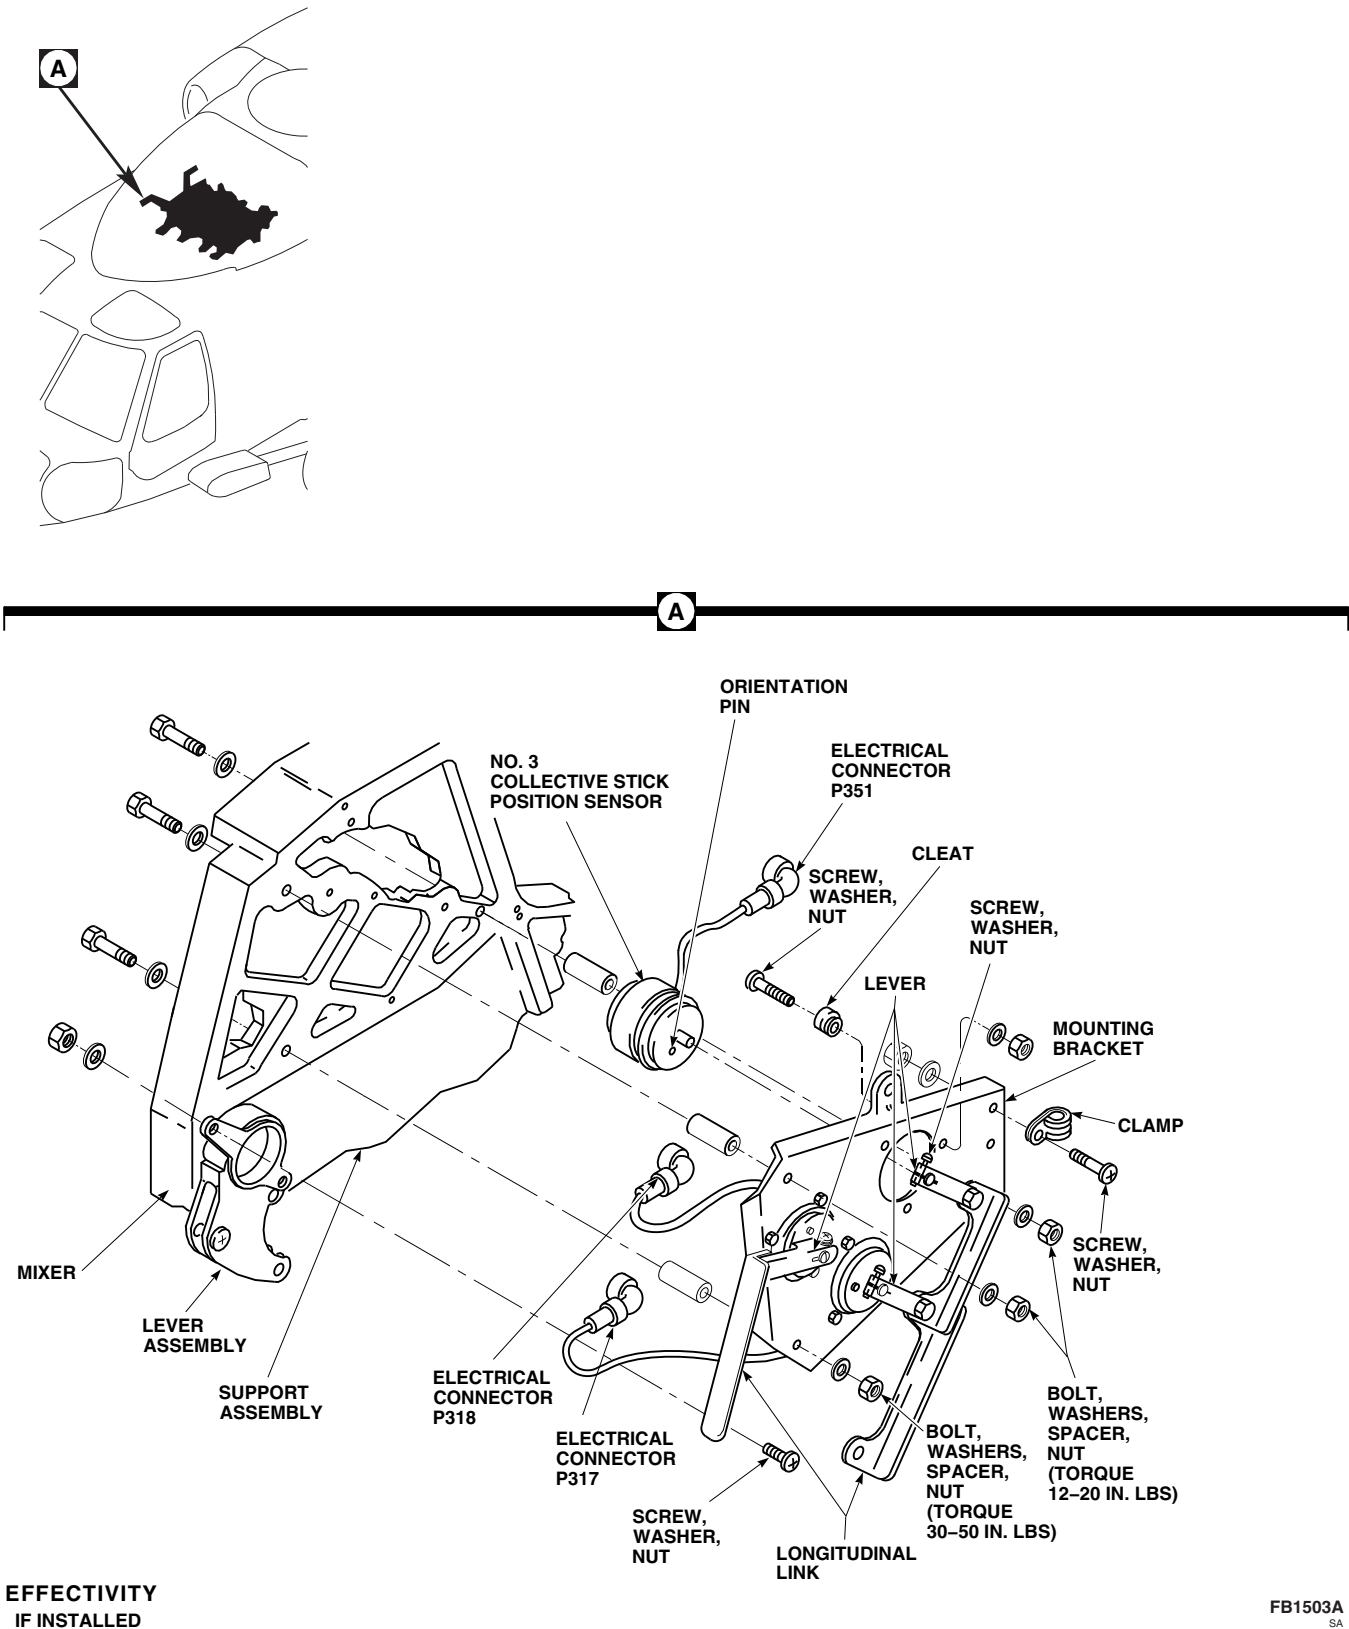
REPLACE NO. 3 COLLECTIVE STICK POSITION SENSOR
